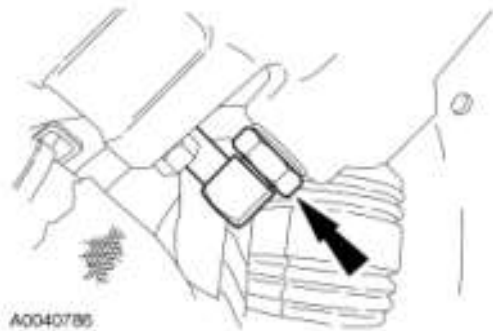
Removing Power Steering Pressure Tube Support Bracket Nut
